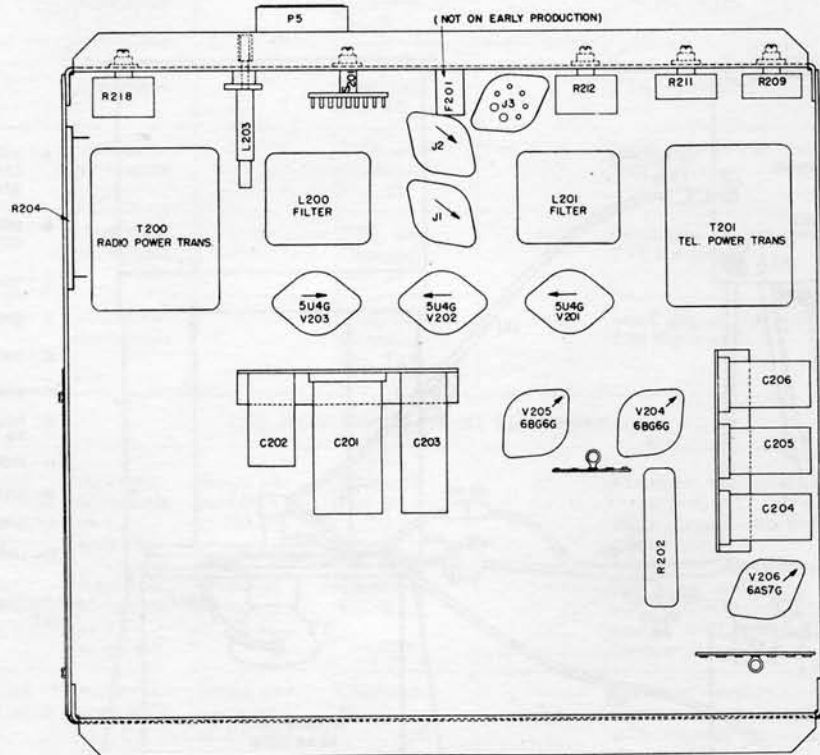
Component Location, Bottom View of Power Supply Chassis
